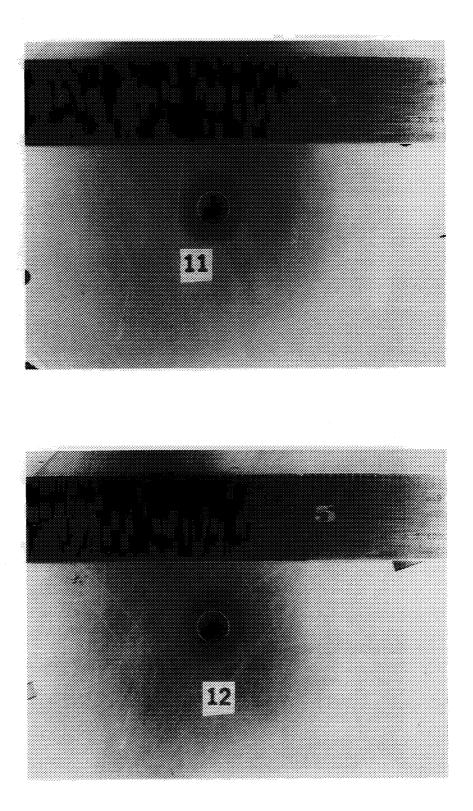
(c). FOOTPRINTS ON MATED PAIR OF 3/16 INCH PLATES.
